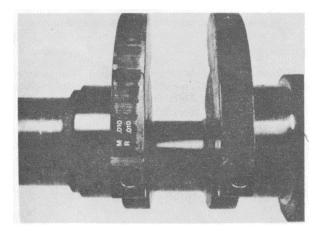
C-17. Undersize Main and Connecting Rod Marking on the Crankshaft
